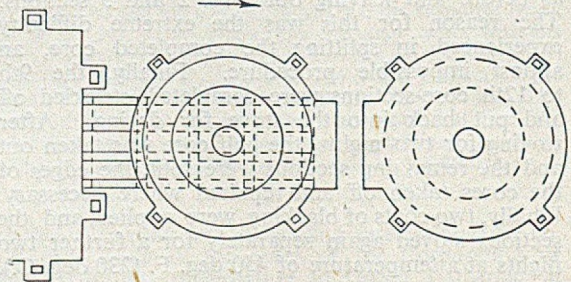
Second Stage in Turning-over the Impeller Core.
